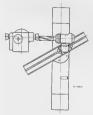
B Set-up for Grinding the End Teeth of Long End Mills
